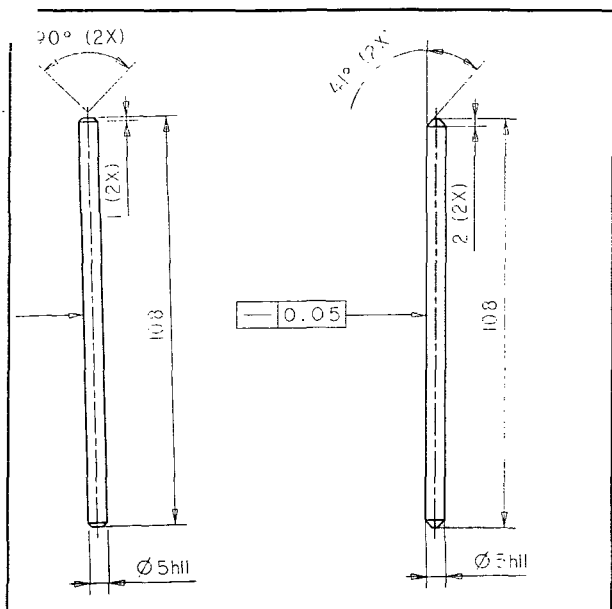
Old and new pin with chamfer for easy mounting (redesigned on Suntools CAD-system)
